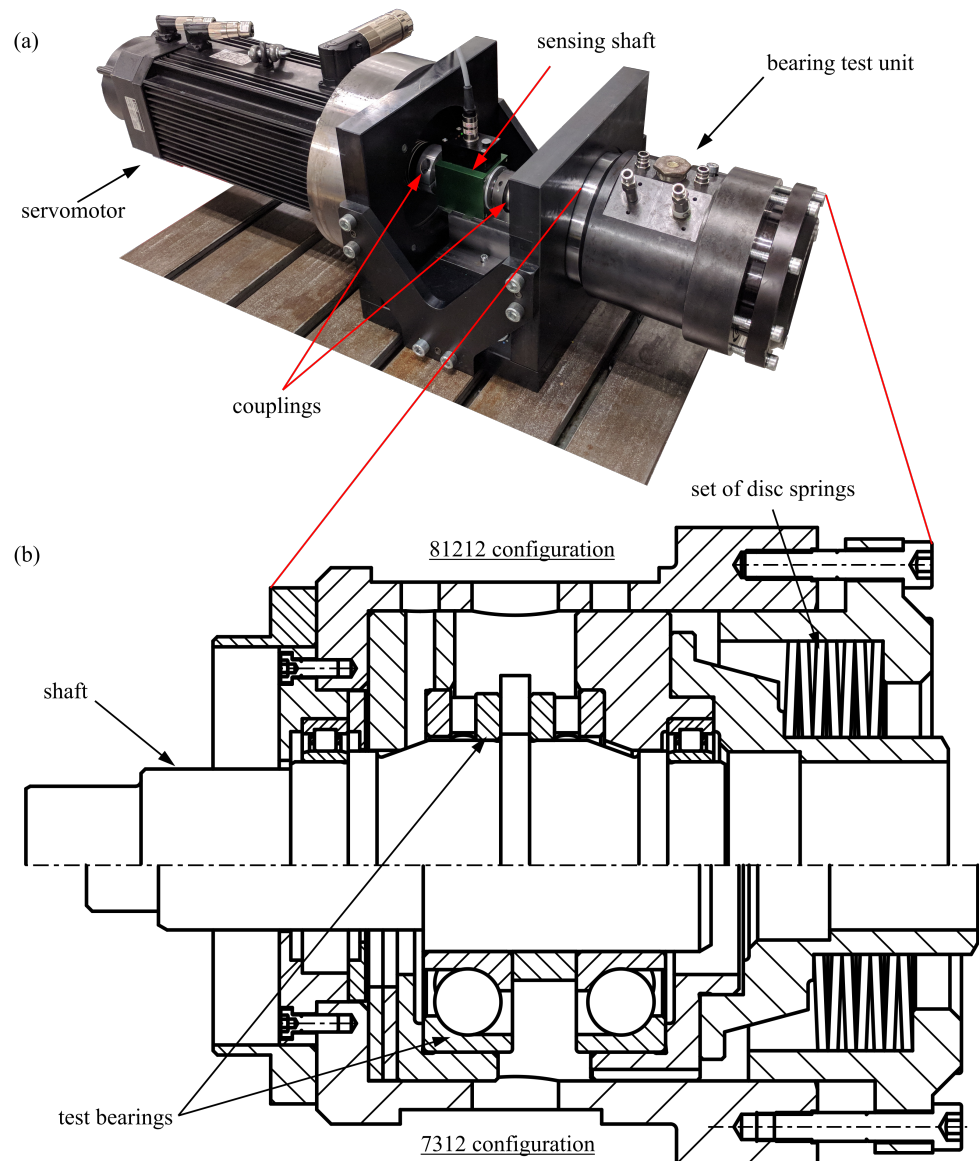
(a) Modified FE8 rig for testing grease-lubricated 81212 CRTB bearings under oscillating conditions; (b) section of modified FE8 test unit for 81212 (upper half) and 7312 (lower half) configuration.
